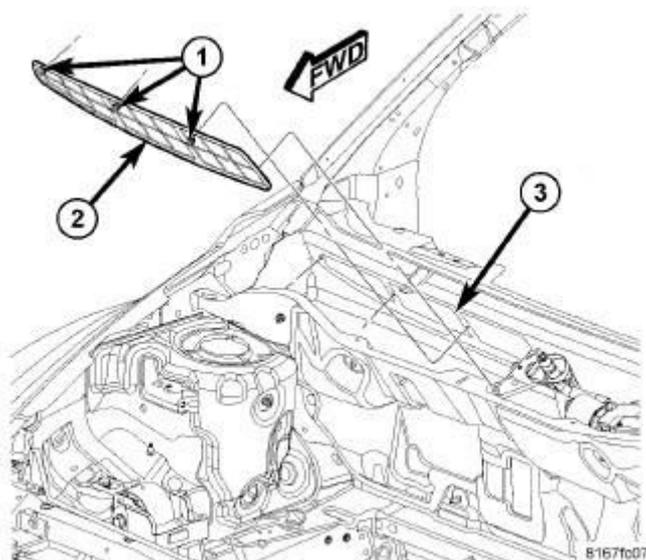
HVAC Housing Air Inlet Screen, Cowl Panel & Push-In Retainers Courtesy of CHRYSLER GROUP, LLC
